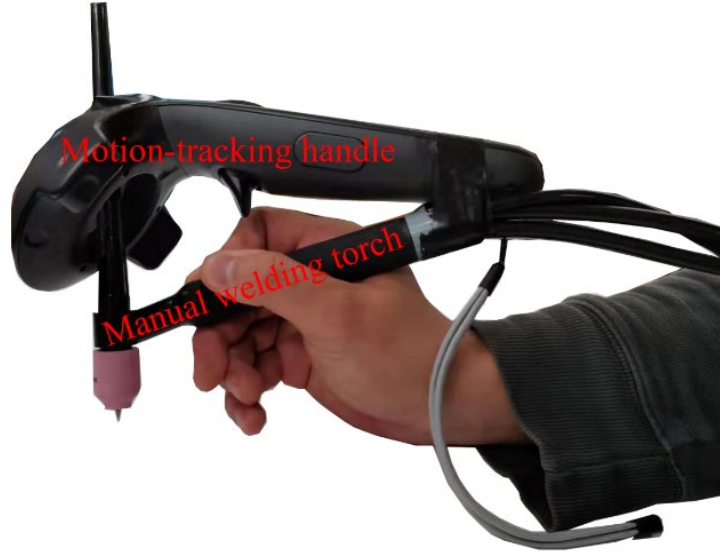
The Human User Demonstrates the Welding Operations Via a Composite Torch Which is Composed of a Manual Torch and a Motion-tracking Handle.
